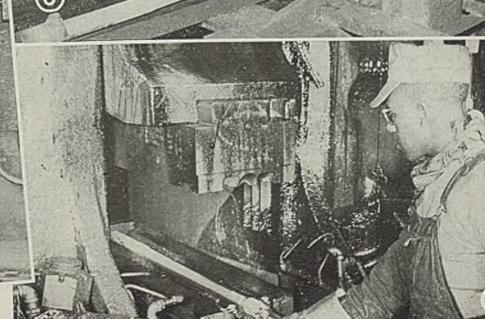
Trim press and conveyor that delivers finished forgings into tote box at right
